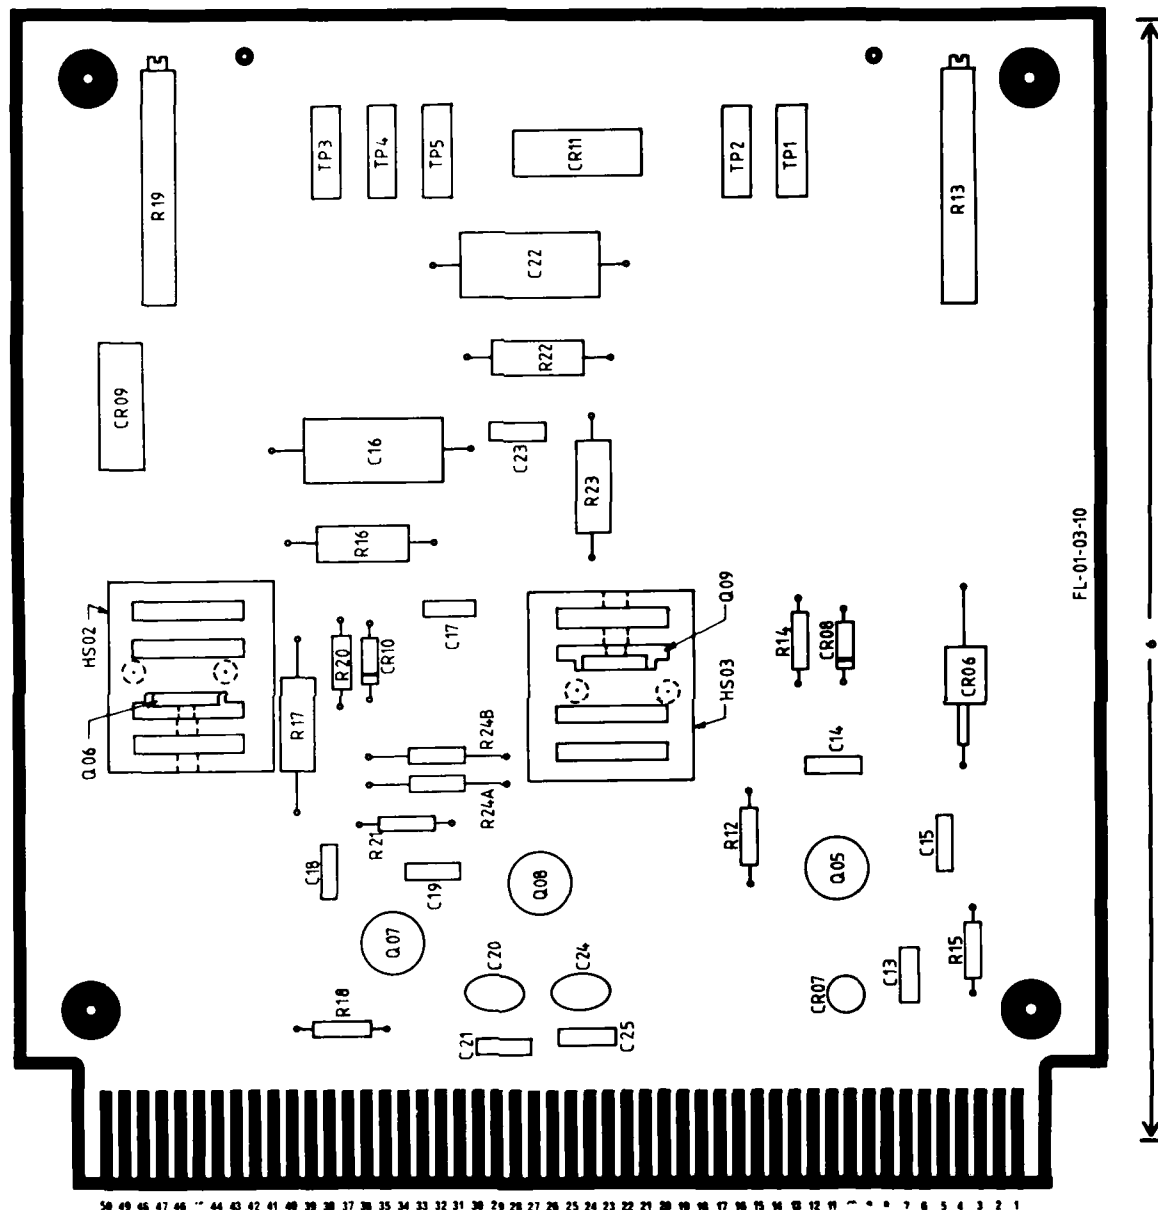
COMPONENT LAYOUT FOR POWER SUPPLY BOARD A
